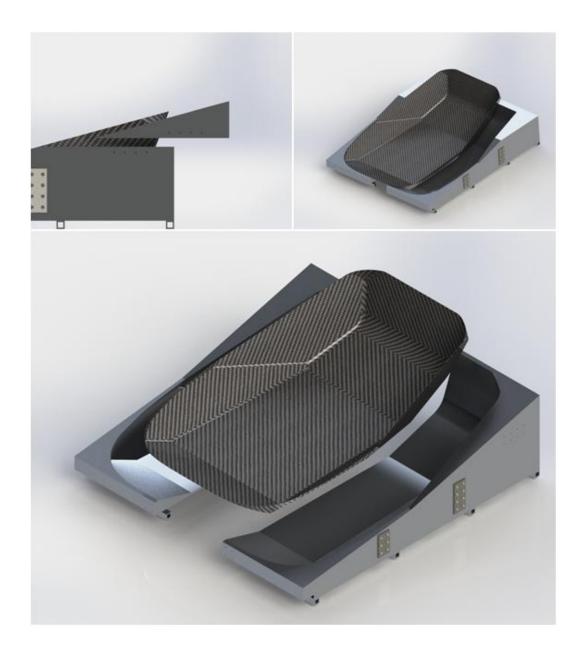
Upper mold removal (left), left mold half removal (right), and part removal (bottom)
